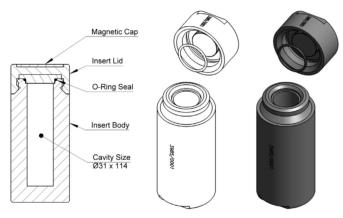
Shielding insert HS-31x114-Tu – Design # 3985
